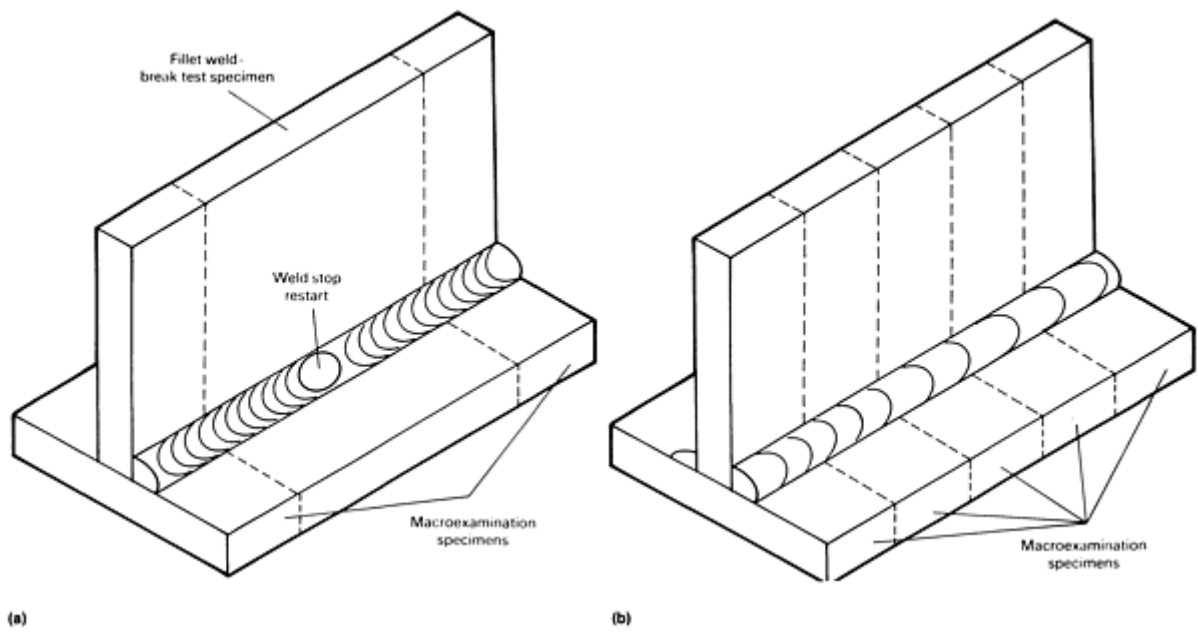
TWO EXAMPLES OF T-JOINT WELDMENTS FOR FILLET WELD QUALIFICATION. (A) FILLET WELD ON ONE SIDE OF T-JOINT. (B) FILLET WELD ON BOTH SIDES OF T-JOINT
